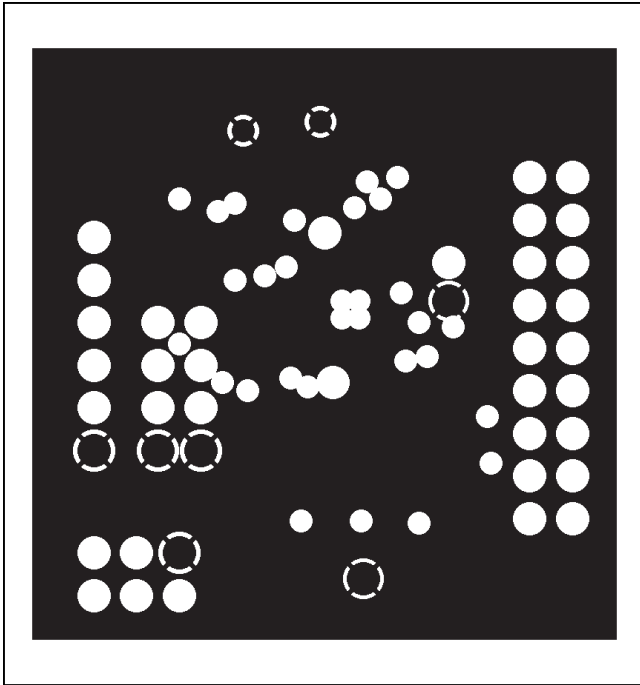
MAX7304PMB1 Peripheral Module PCB Layout—Inner Layer 2 (Power)
